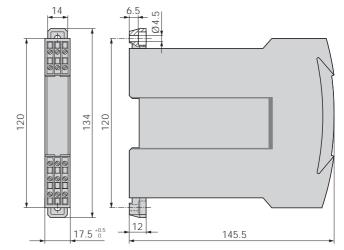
SINEAX B 811 in housing \$17 screw hole mounting brackets pulled out.
